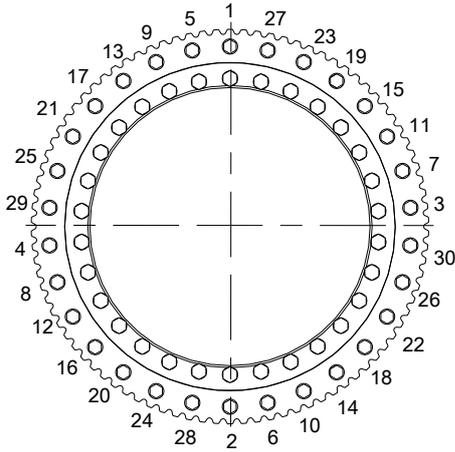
Tightening Sequence of Slewing Bearing Bolts
